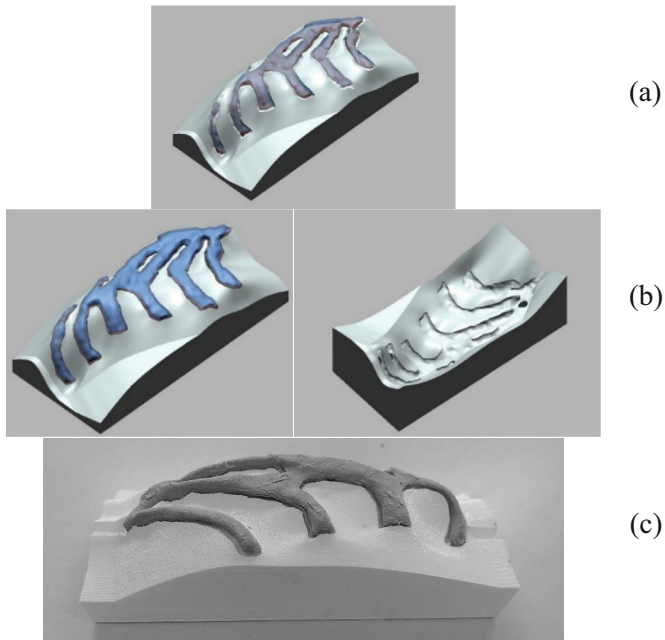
a) CAD model of the mold for the outer layer with the inner layer supported held in place by spacers; b) CAD model of the result of the double phase casting procedure; c) FDM printed model of the outer layer with inner layer placed on the spacers.
